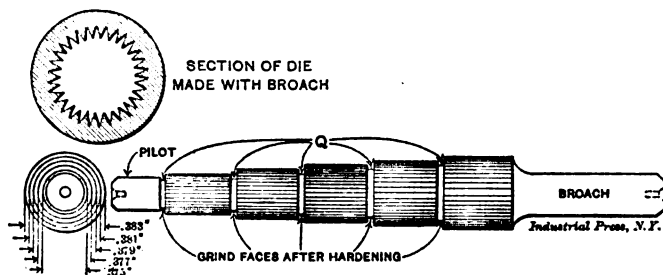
Broach for making Dies for Gear Blanks, etc.
